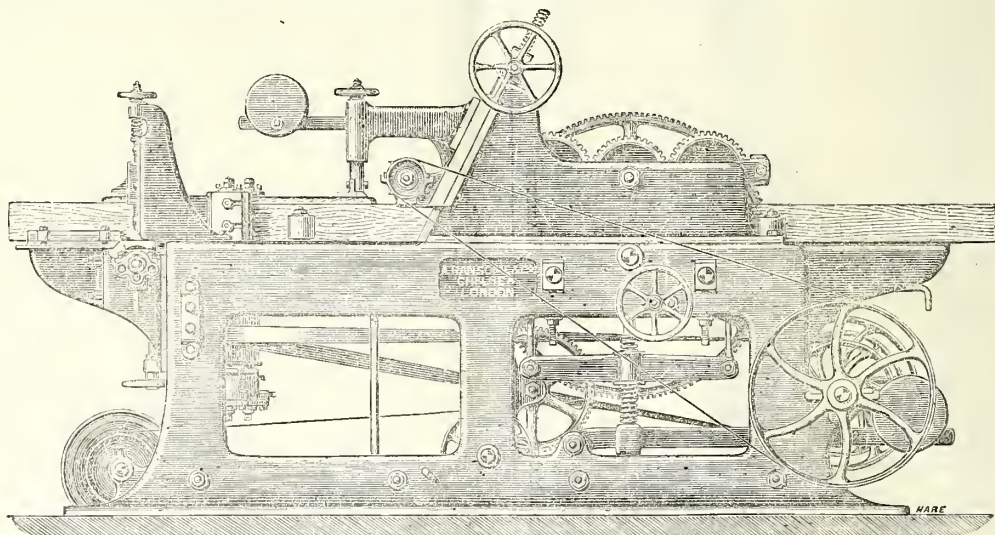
MESSRS. ALLEN RANSOME & CO.'S PATENT COMBINED PLANING AND MOULDING MACHINE.
